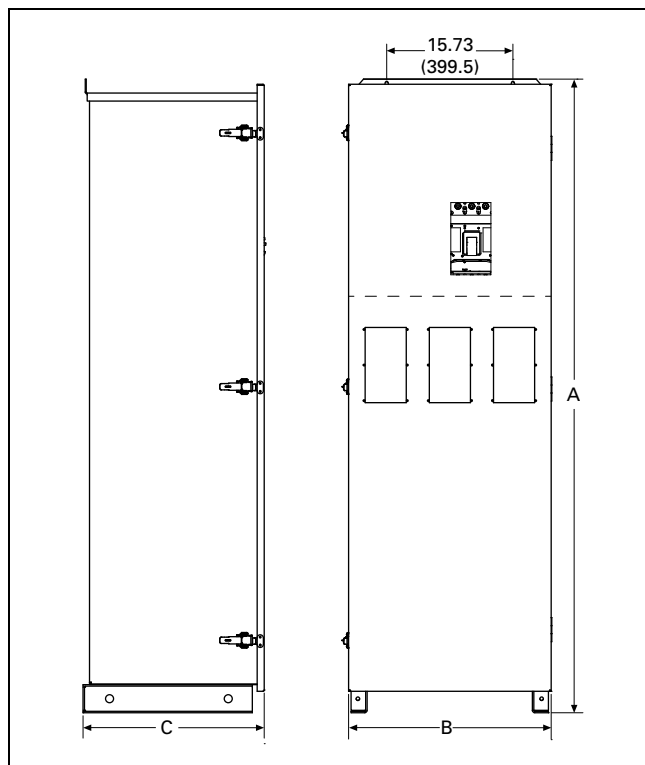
Automatic, 225–400 A, NEMA 1 and NEMA 3R Floor Standing Wall Attached
